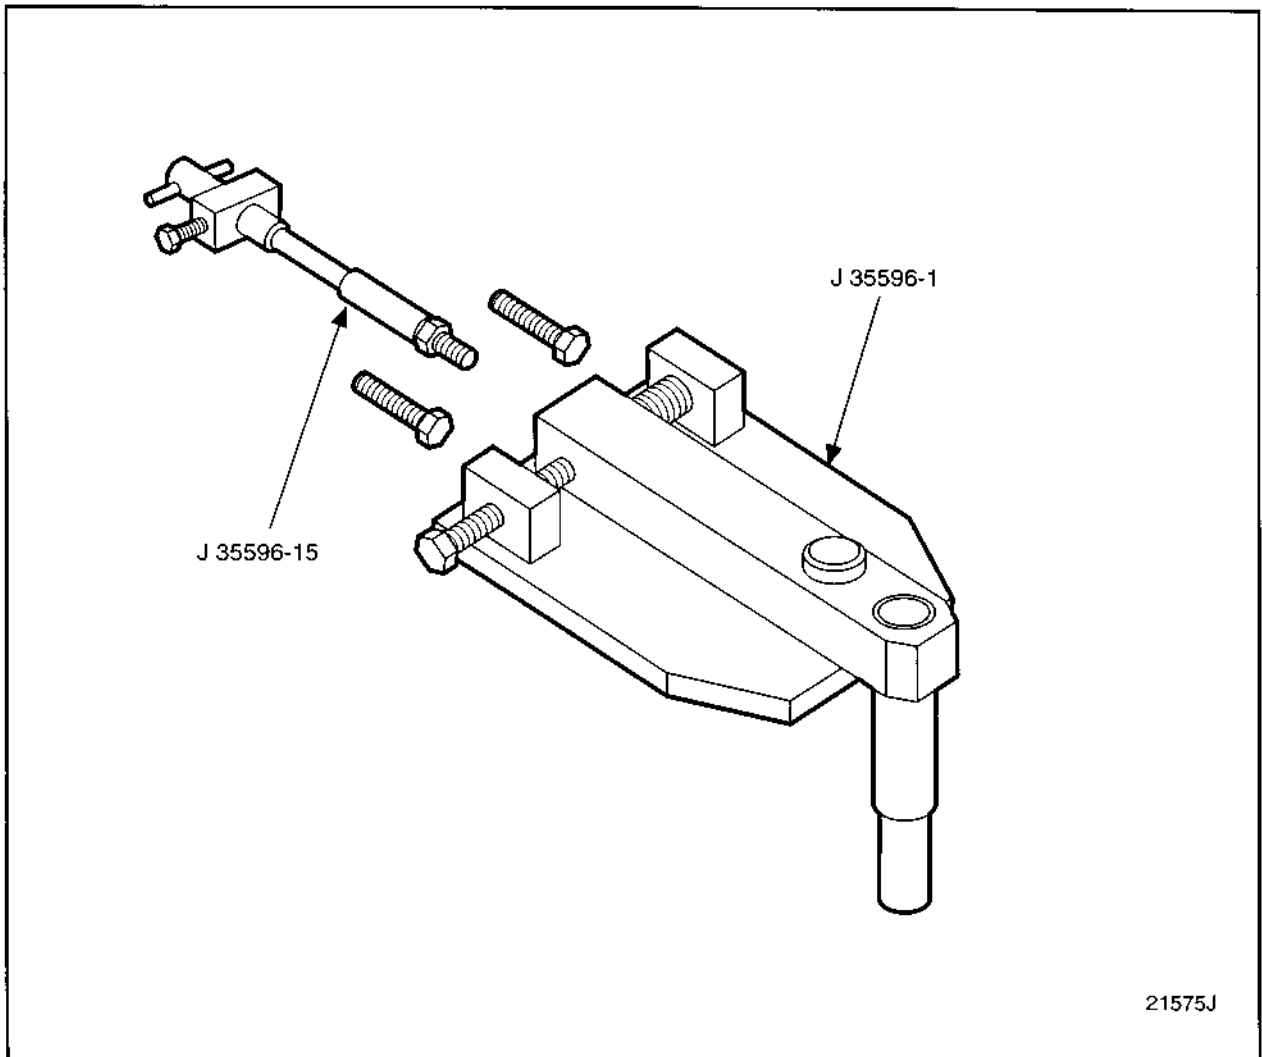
Cam & Idler Gear Lash Adapter ,J 35596
